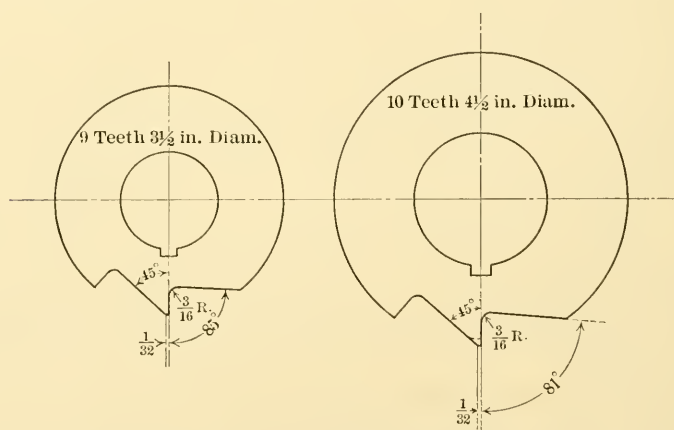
FORM OF SPIRAL MILLING-CUTTERS NOW USED BY THE CINCINNATI MILLING MACHINE COMPANY
